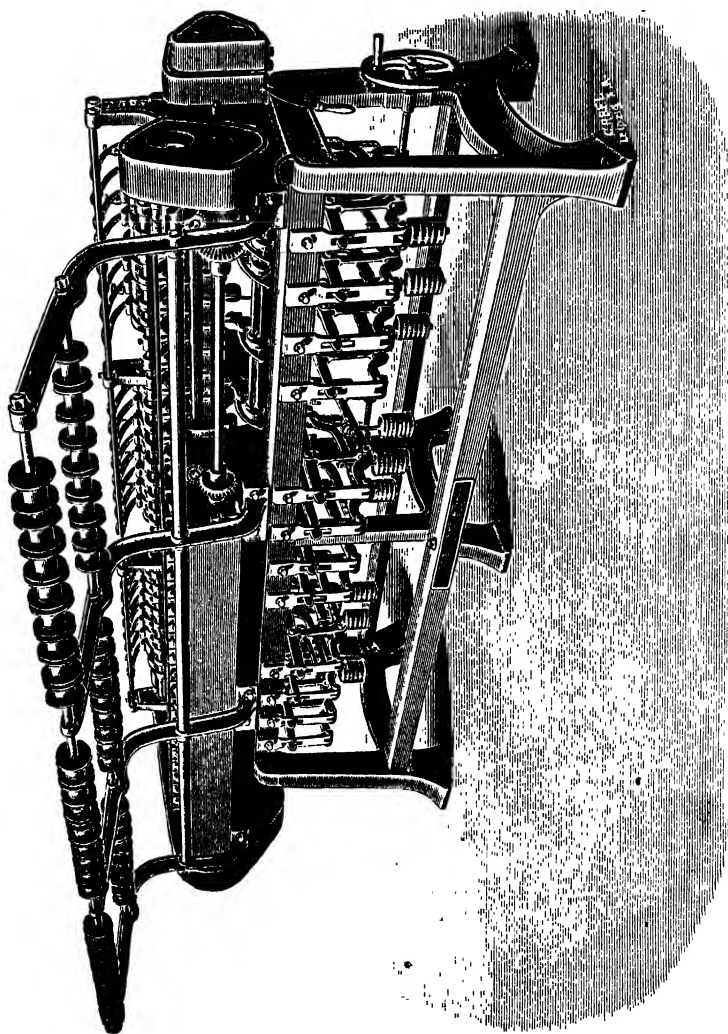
Rear view of drawing frame for flax, hemp, jute, or tow.
